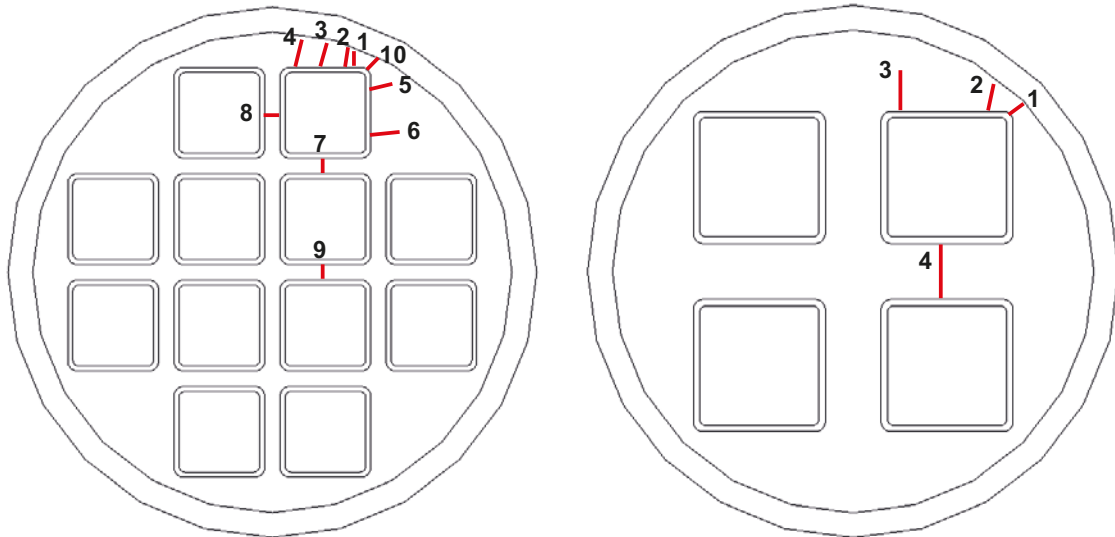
Schematic position of the axial crack-like defects in the BWR and PWR insert cross sections.
